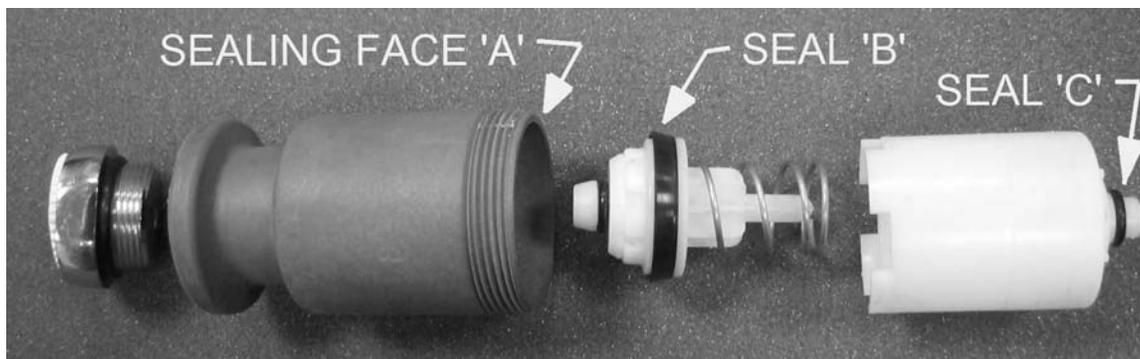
Timed flow control mechanism. When re-assembling, ensure that the piston can move freely in the cylinder. Lubricate sealing face 'A' and piston seal 'B' using a little silicon oil and re-assemble. Ensure that seal 'C' is present when the parts are dismantled and on re-assembly. Occasionally it can fall into the shower panel on dismantling.
